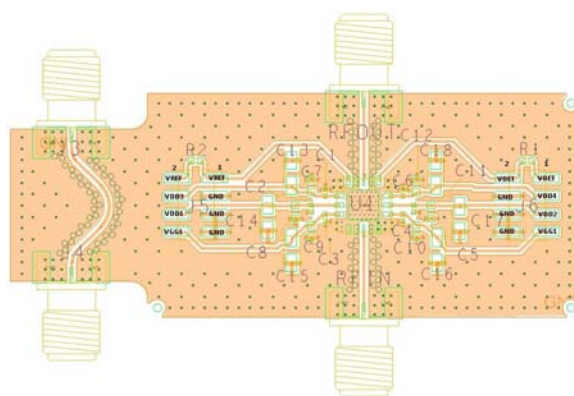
ADPA7006-EVALZ Assembly Drawing (J3 and J4 Not Installed)
